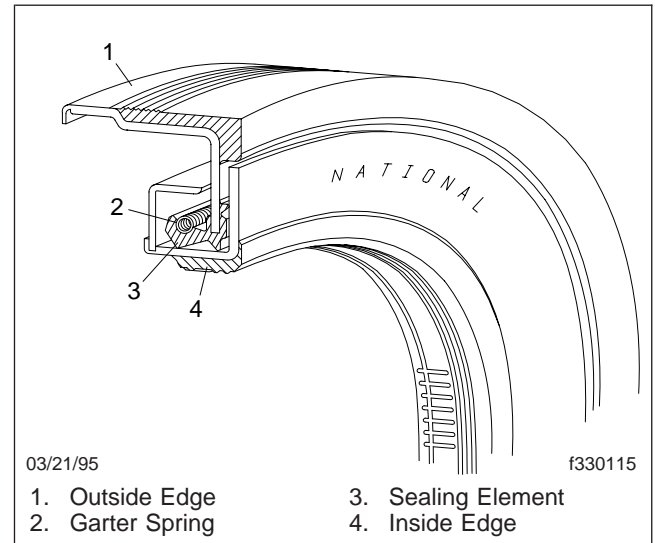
, Wheel Oil Seal Parts, National Oil Seal, Advanced Design
